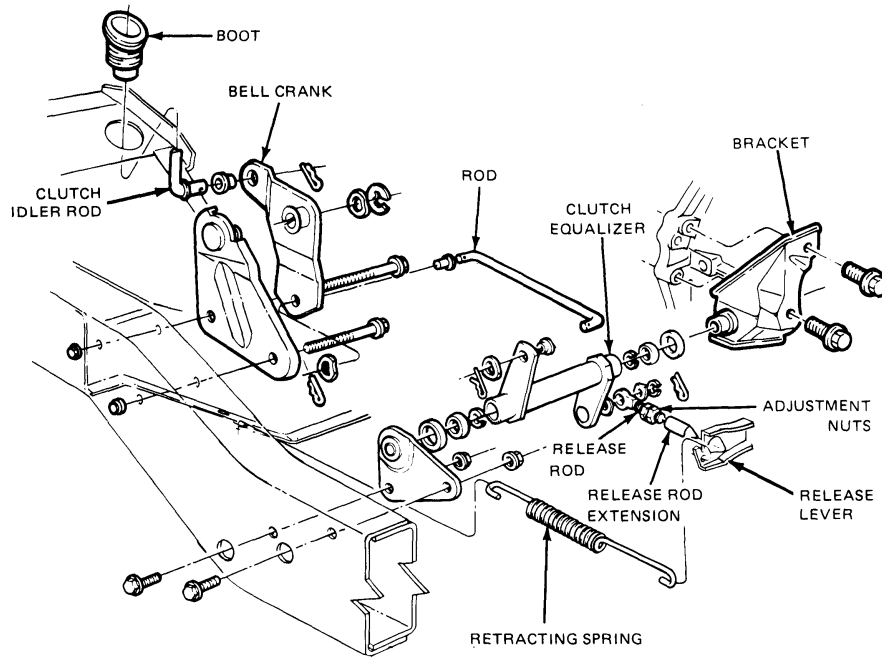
Clutch Mounting and Linkage—E-100—E-350
